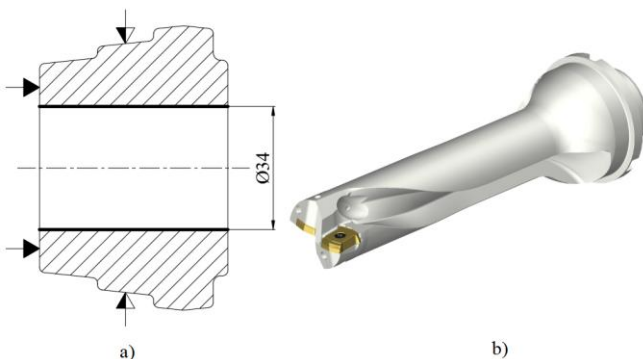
(a) First pass, (b) Straight - flute drill that uses indexable inserts
